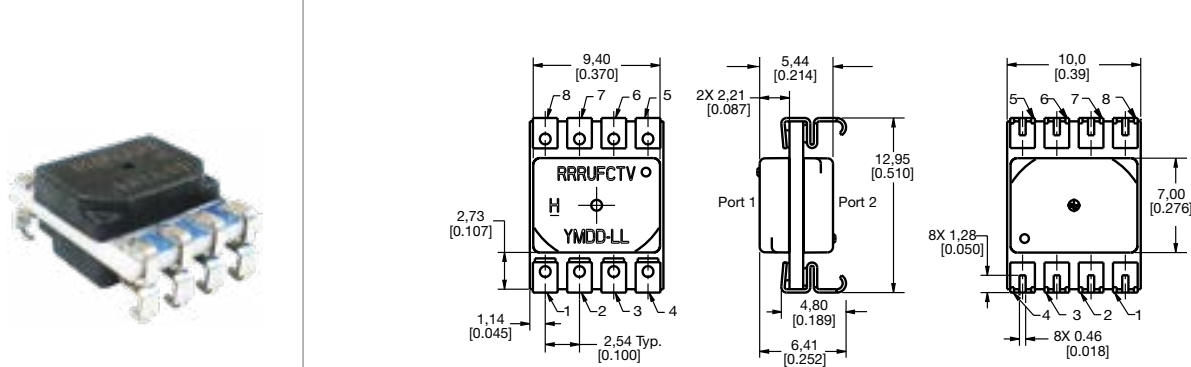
SMT Package Dimensional Drawings (For reference only: mm [in].)
